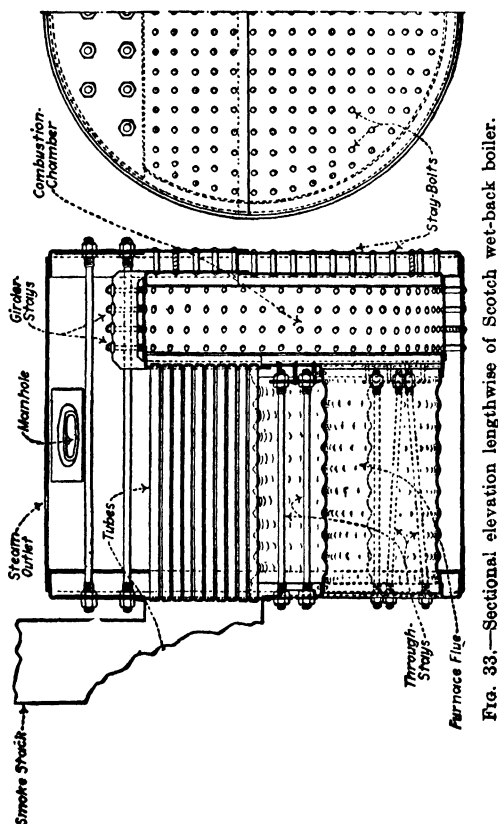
Sectional elevation lengthwise of Scotch wet-back boiler.
